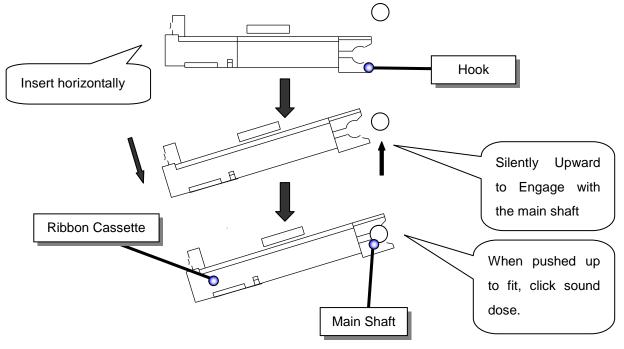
Reattaching to the Main Shaft (Ribbon Cassette Sectional View)
